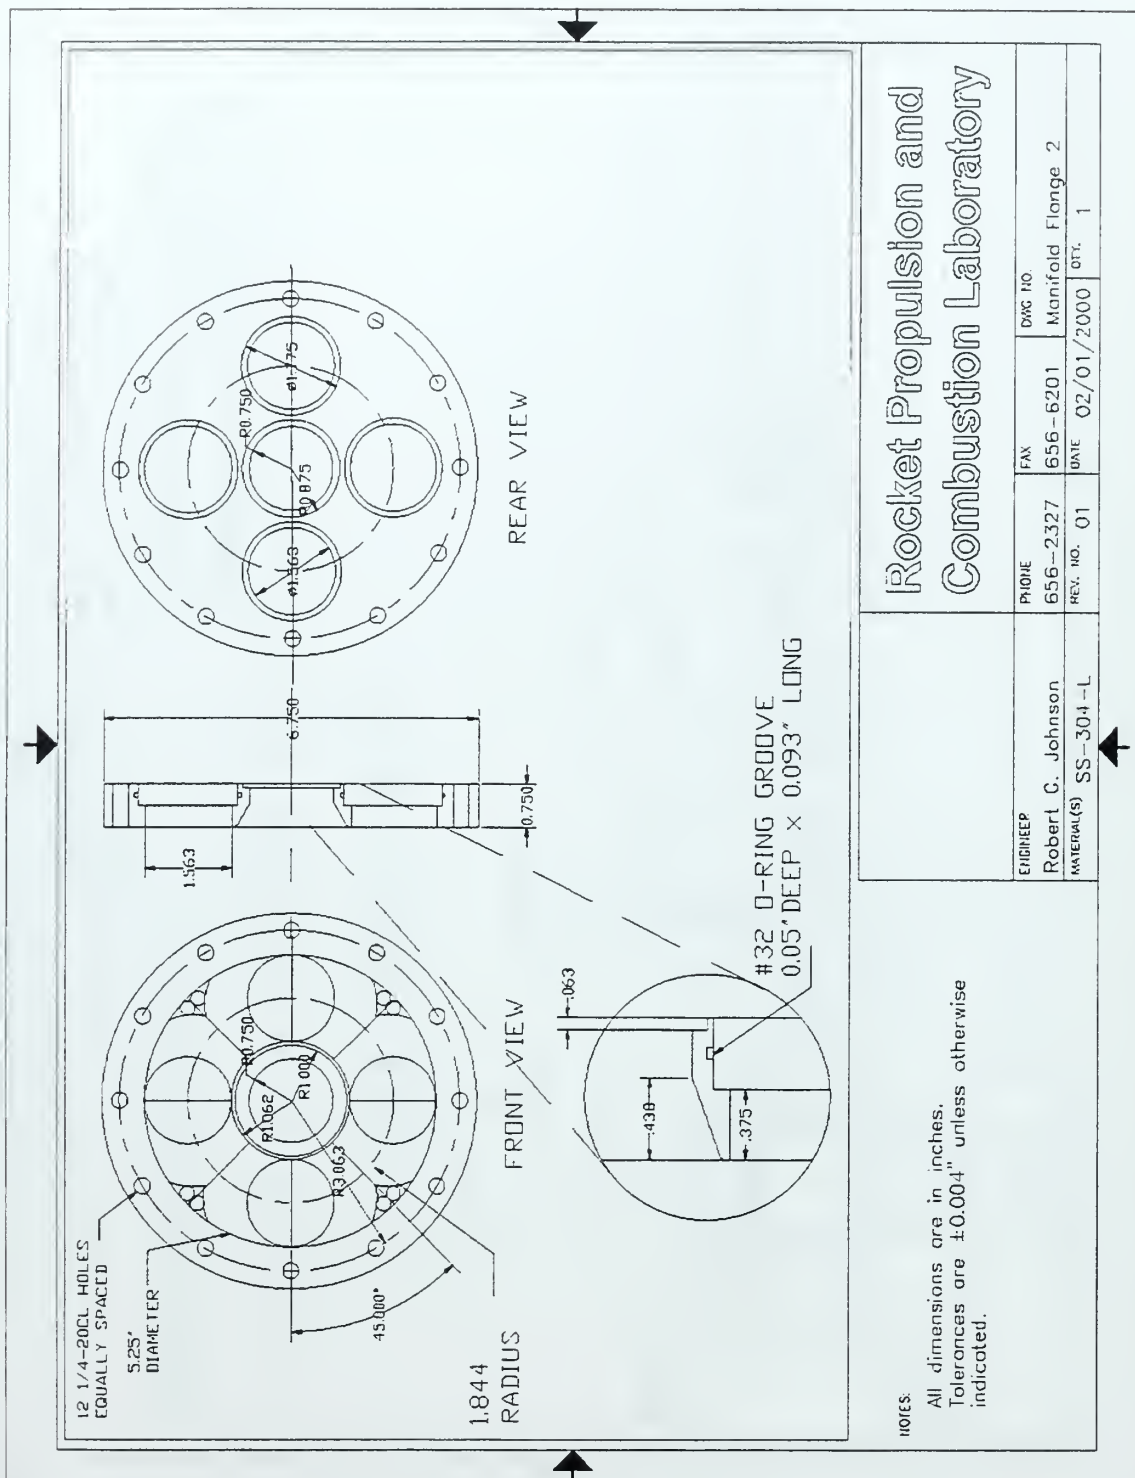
This manifold flange was a modification to the previous drawing to ease the step that the detonation wave emerging from the pre-detonation tube made to the main combustion tube.
